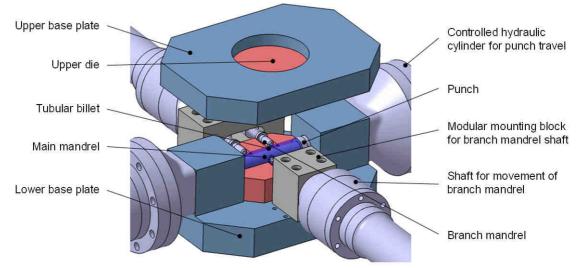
Concept of an installer tool for hollow lateral extrusion of forming parts with two or more intersection points of main body centreline and centrelines of branches.
